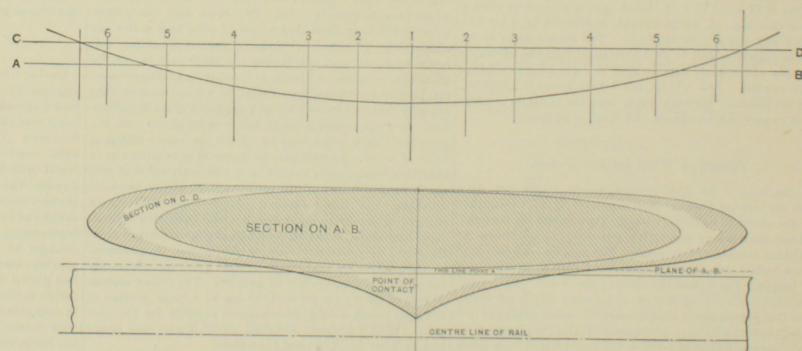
Elevation and Horizontal Sections of Pennsylvania R. R. Wheel.
